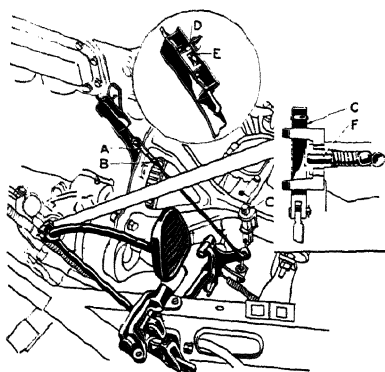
ADJUSTMENT OF CLUTCH CIRCUIT BREAKER—CIRCUIT CLOSED POSITION
